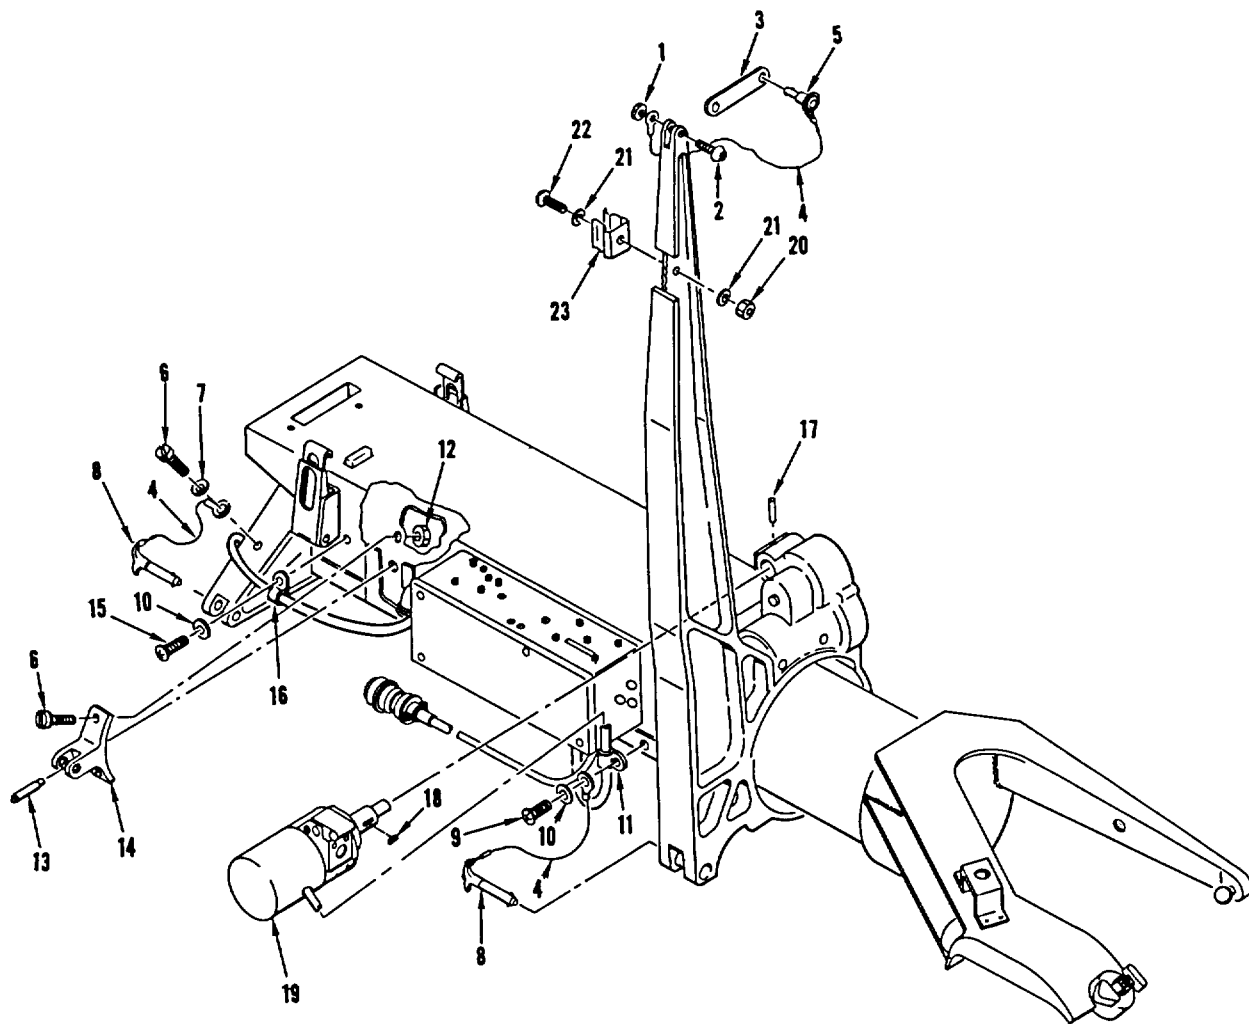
Control box subassembly-partially exploded view (sheet 3 of 3).
